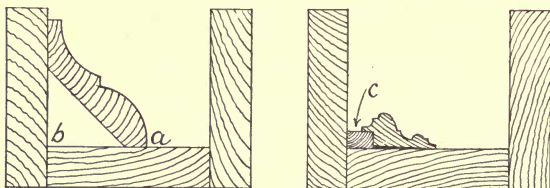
CUTTING THE MITER OF CROWN OR SPRUNG MOLDINGS.
